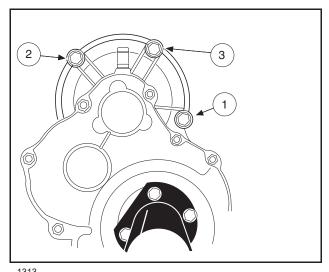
EJ8–4001A Motor Mounting Bolts and Tightening Sequence
